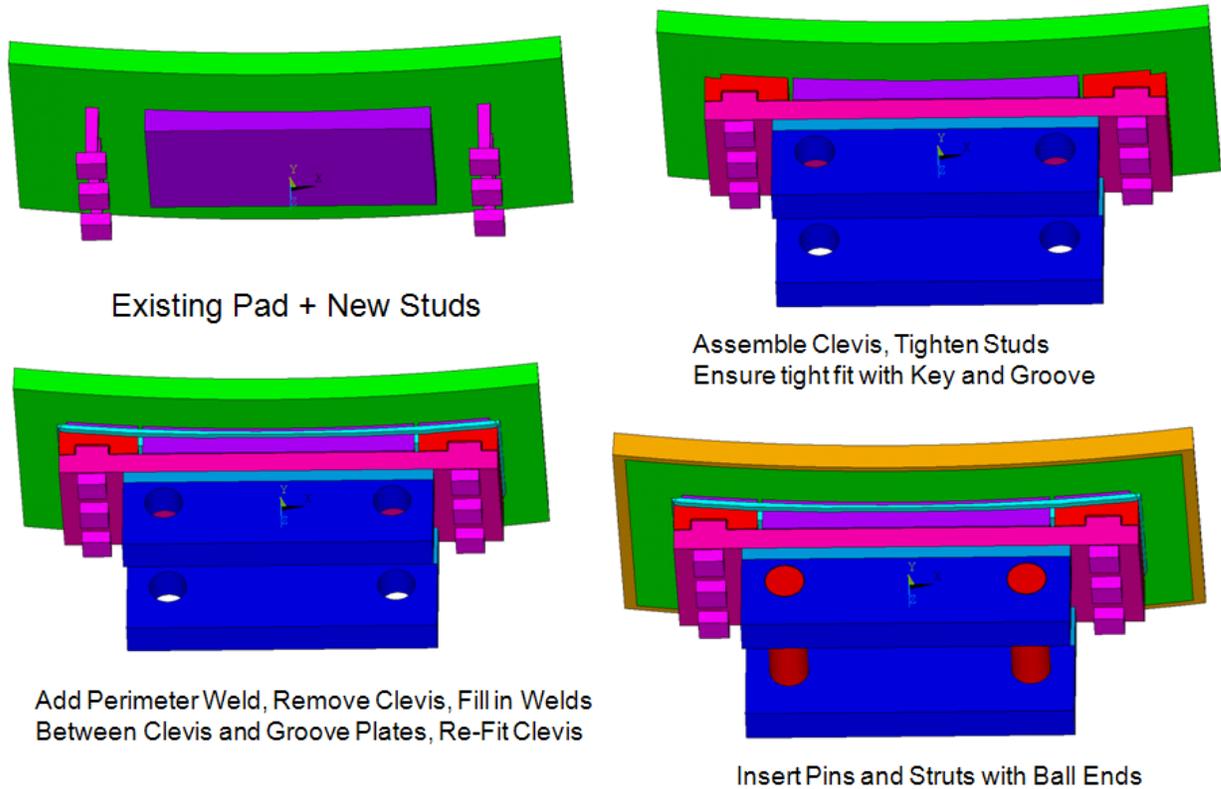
Bolted Clevis with Added Groove Plates
